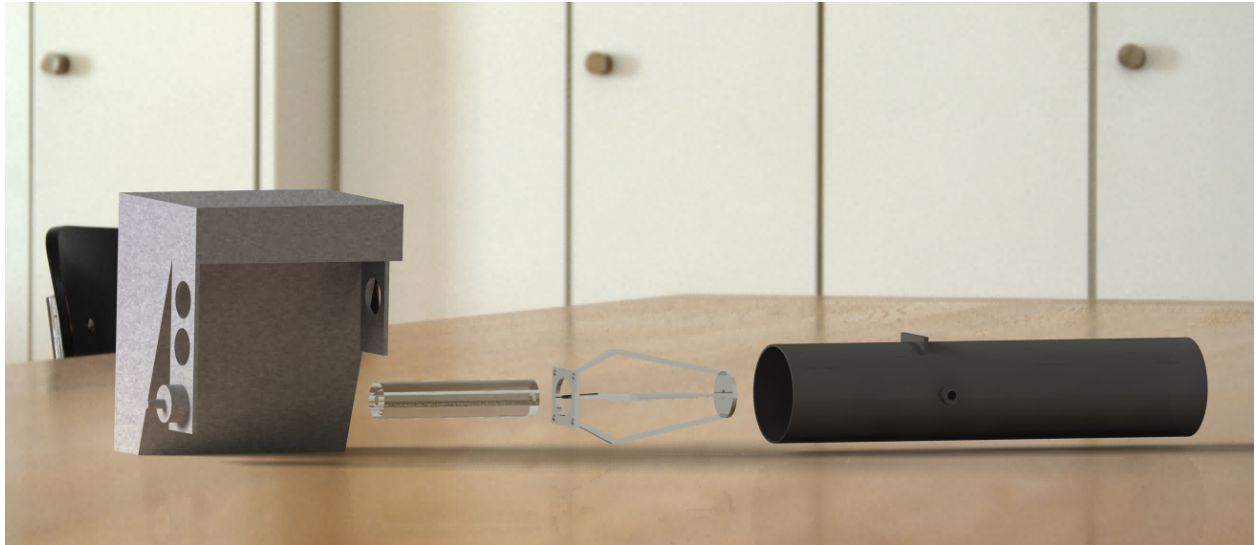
Exploded View of Solid Modeled Hybrid Rocket and Duct
